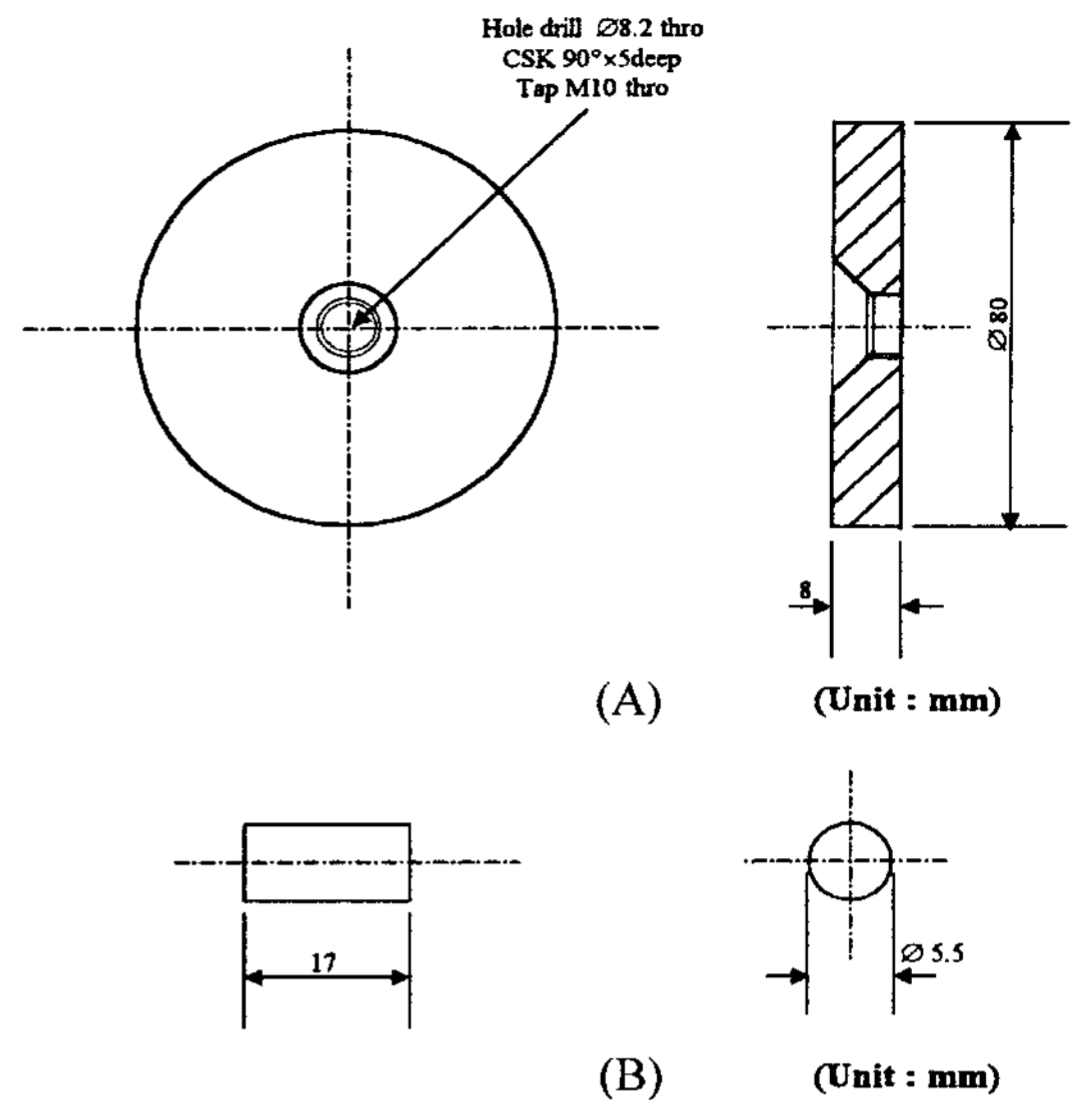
Shape and dimension of (A) revolving disc and (B) test specimen.
